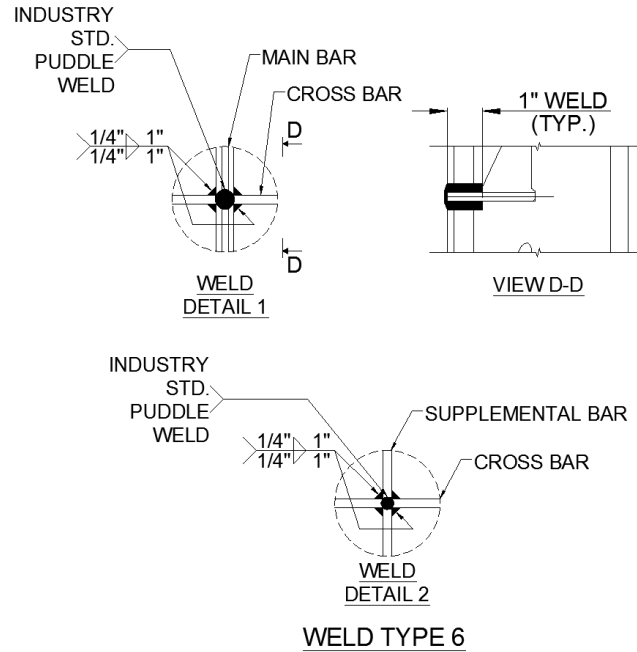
Type 6 weld detail (original detail provided by the BGFMA)
